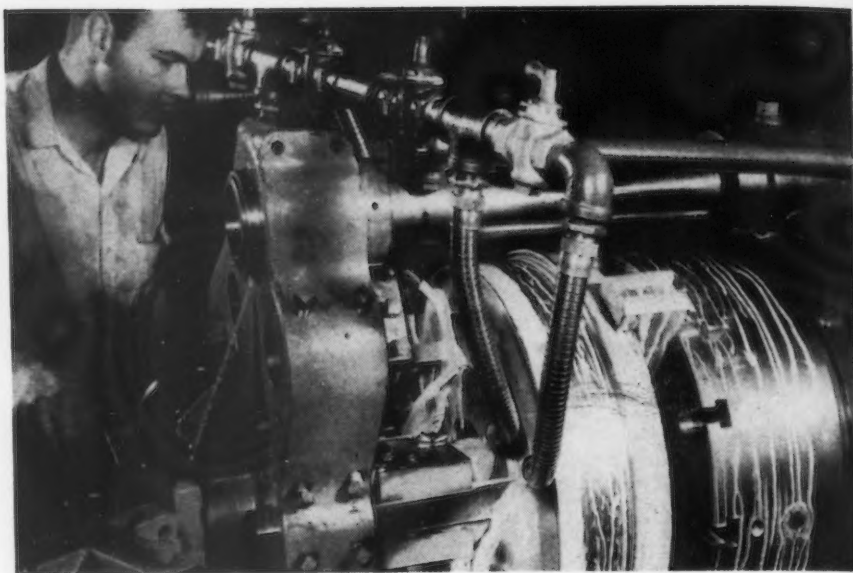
Scroll chuck body being turned on one of the new 3R model lathes. Indicative of the capacity of these machines, this big forging is being turned at 280 ft. per min. and 0.009 in. feed, using carbide tools.
